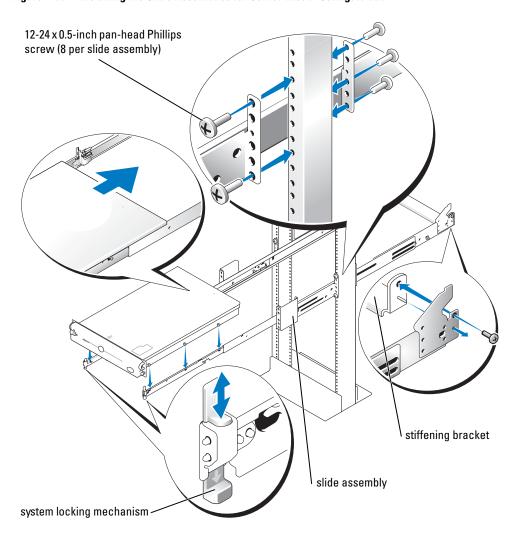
Installing the Slide Assemblies for Center-Mount Configuration
